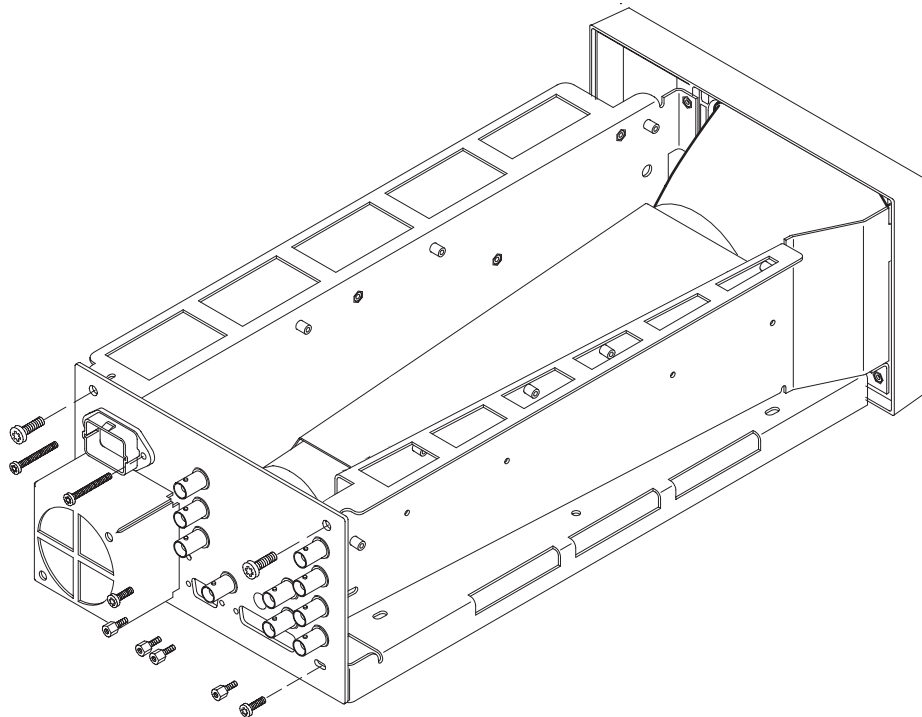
Removing the Rear Panel And Input/BNC Assembly
